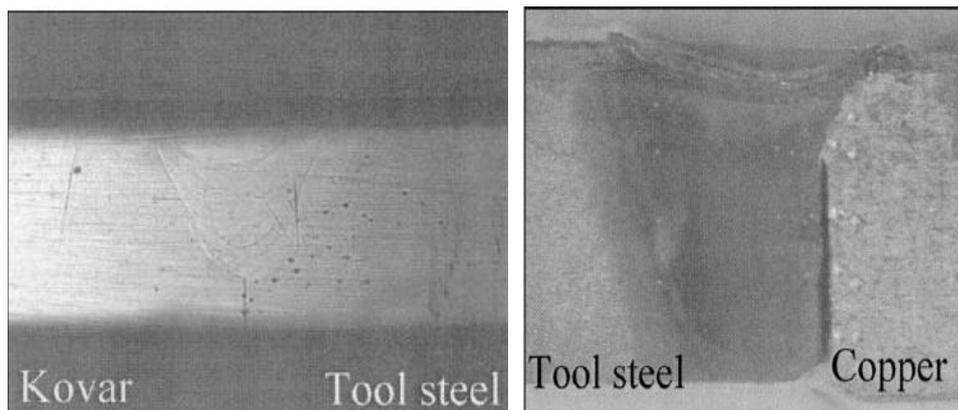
Dissimilar laser welding of Kovar- tool steel, tool steel- copper (T.A.Mai).
